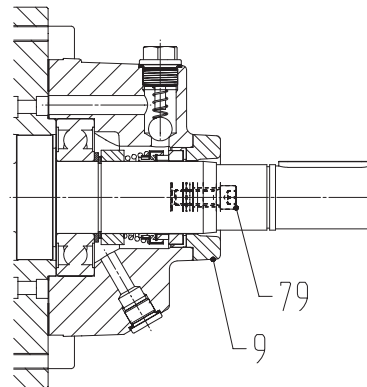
SN..ER..U, internal bearing, mechanical seal (sizes 940 - 3600)
